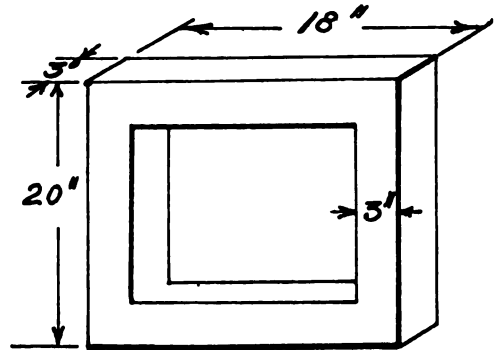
OVERALL DIMENSIONS FOR THE CORE OF 5 KW. TRANSFORMER
